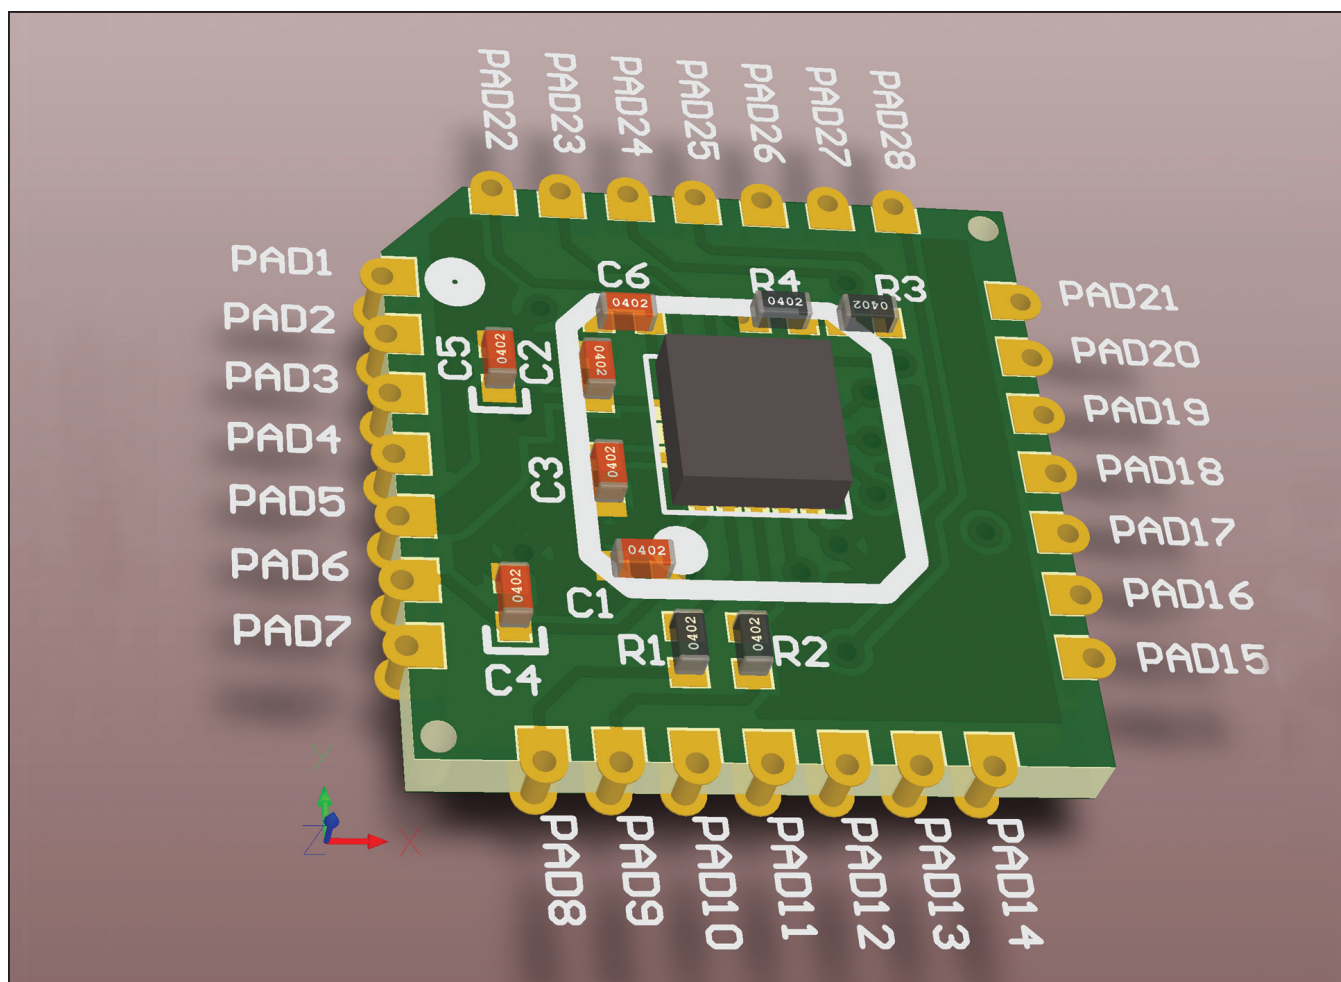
MAX21000 STAMP Board Adapter Support—3D View
